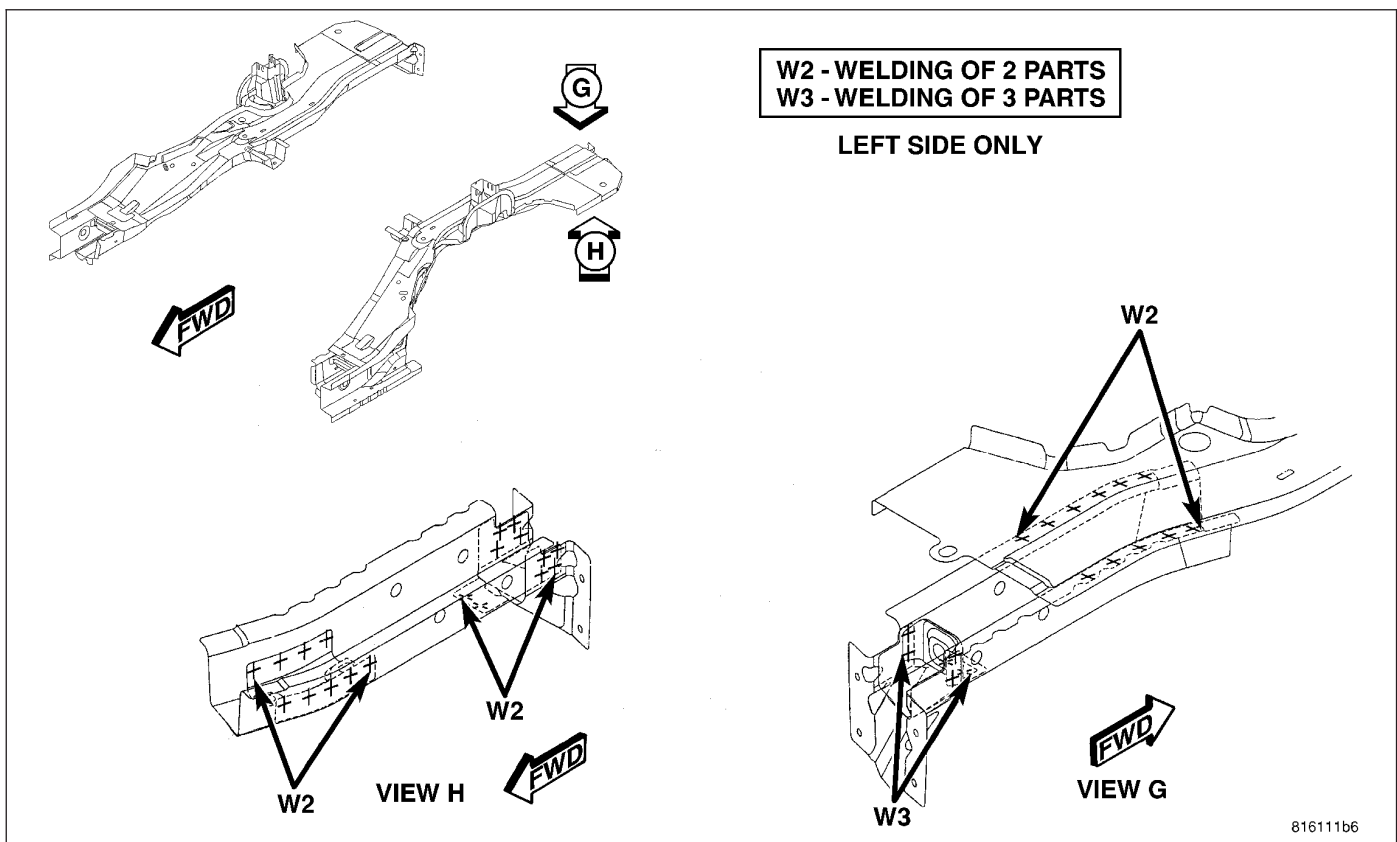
SIDEMEMBER ASSEMBLY (10 OF 17)
